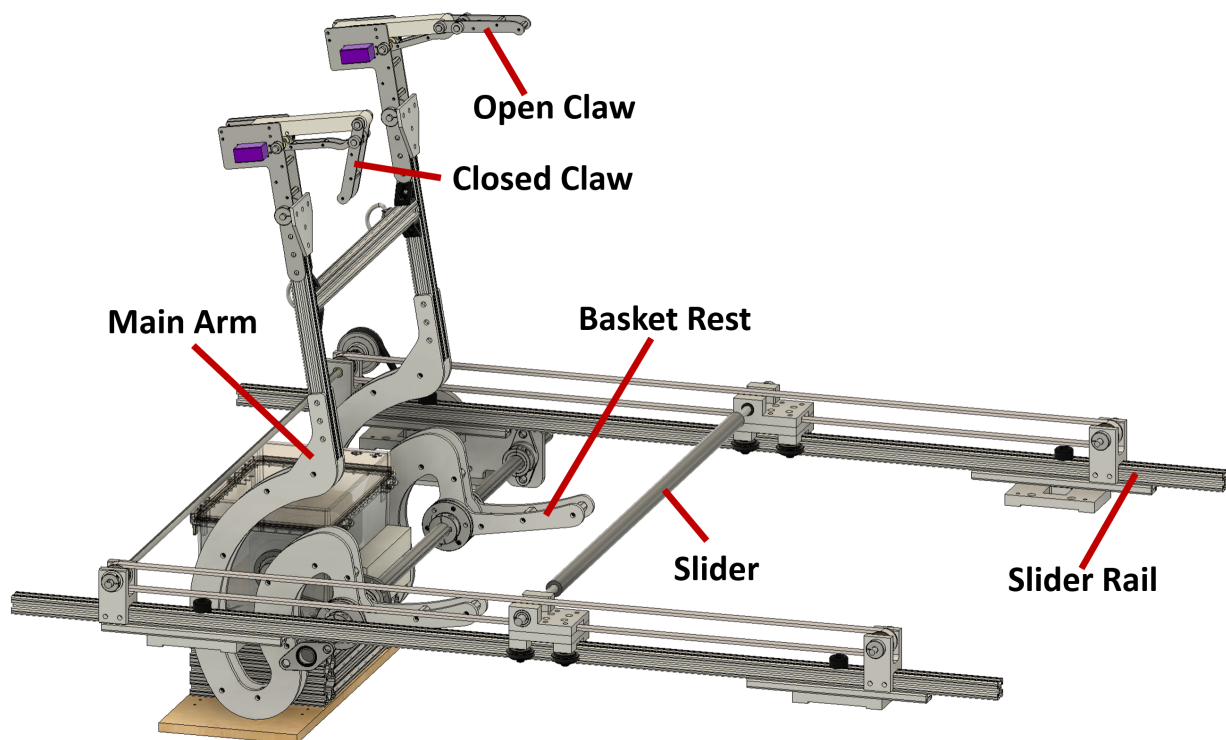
CAD of the bag handling mechanism. The claws, arm, slider, and slider rails are all labeled. Two springs which assist in the initial arm lift are not pictured.
